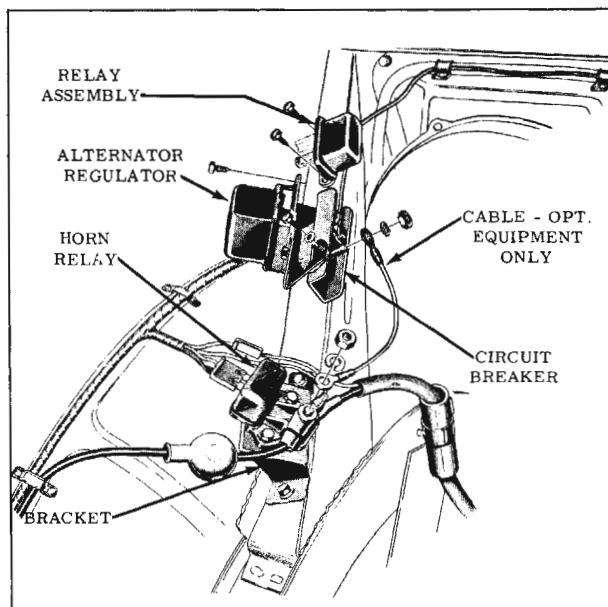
Voltage Regulator and Indicator Lamp Relay Mounting
